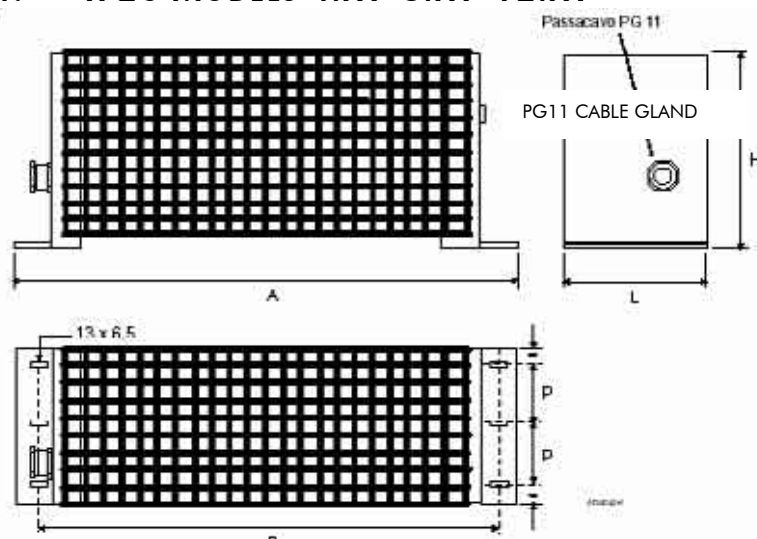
Overall dimensions for braking resistors 4 kW, 8 kW and 12 kW
